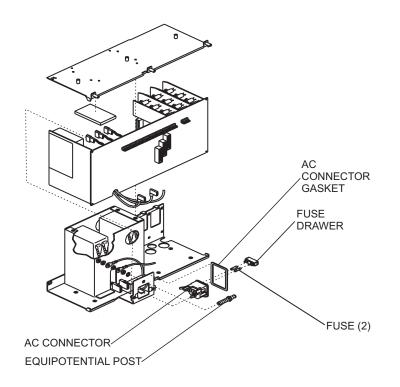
Fuses, Fuse Drawer, and AC Connector
